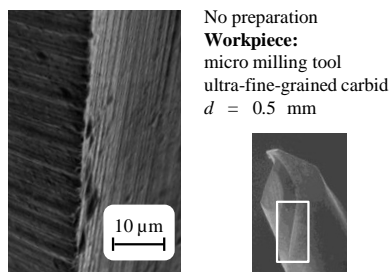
micro milling tool after final grinding with no additional edge preparation [11]
